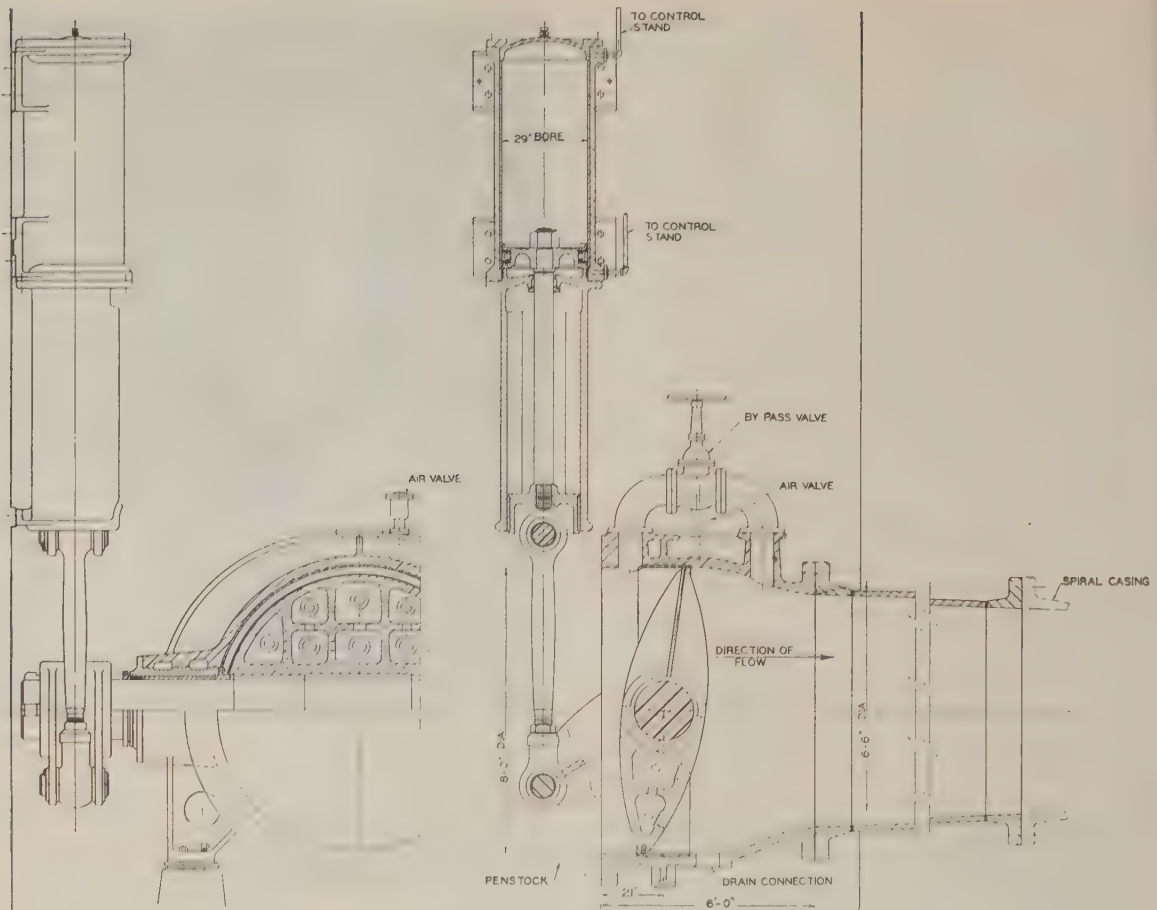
SECTIONAL ARRANGEMENT VIEW OF BUTTERFLY VALVE AND OPERATING GEAR
